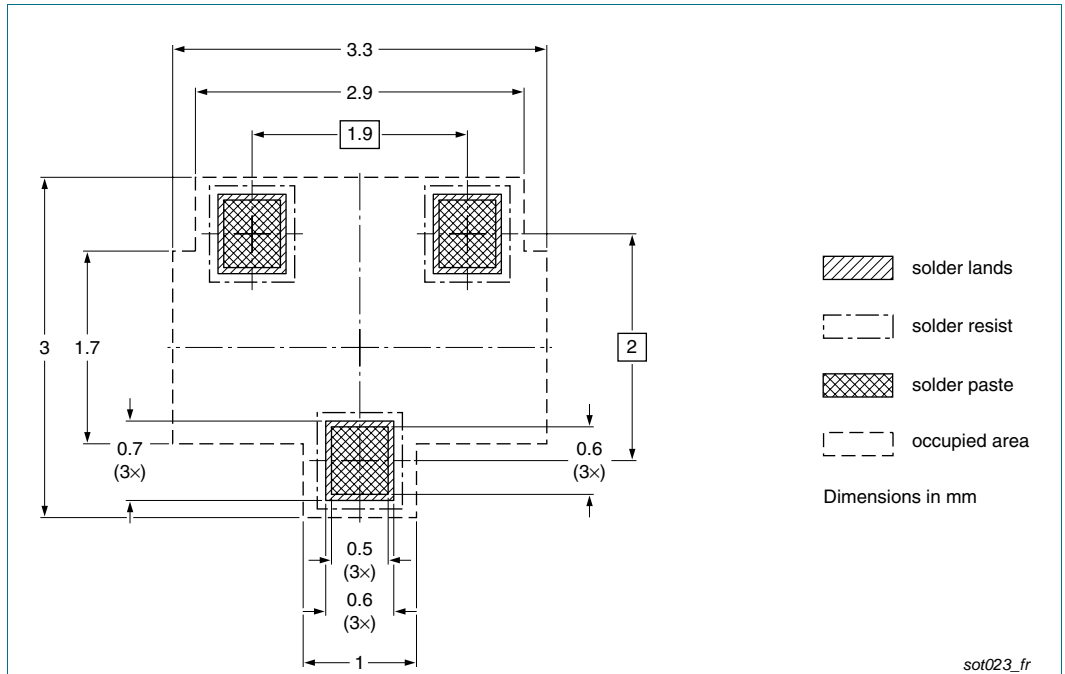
Reflow soldering footprint SOT23 (TO-236AB)
